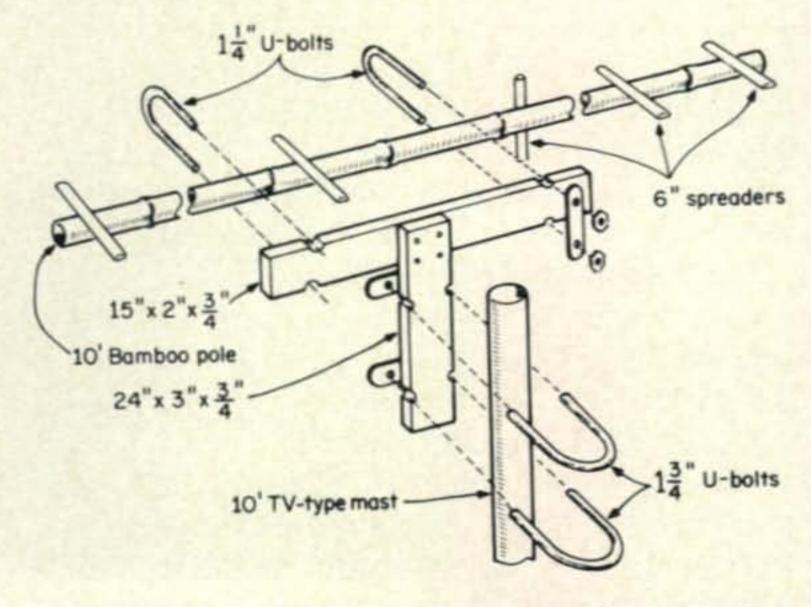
Center boom construction. See text for detailed assembly instructions.
